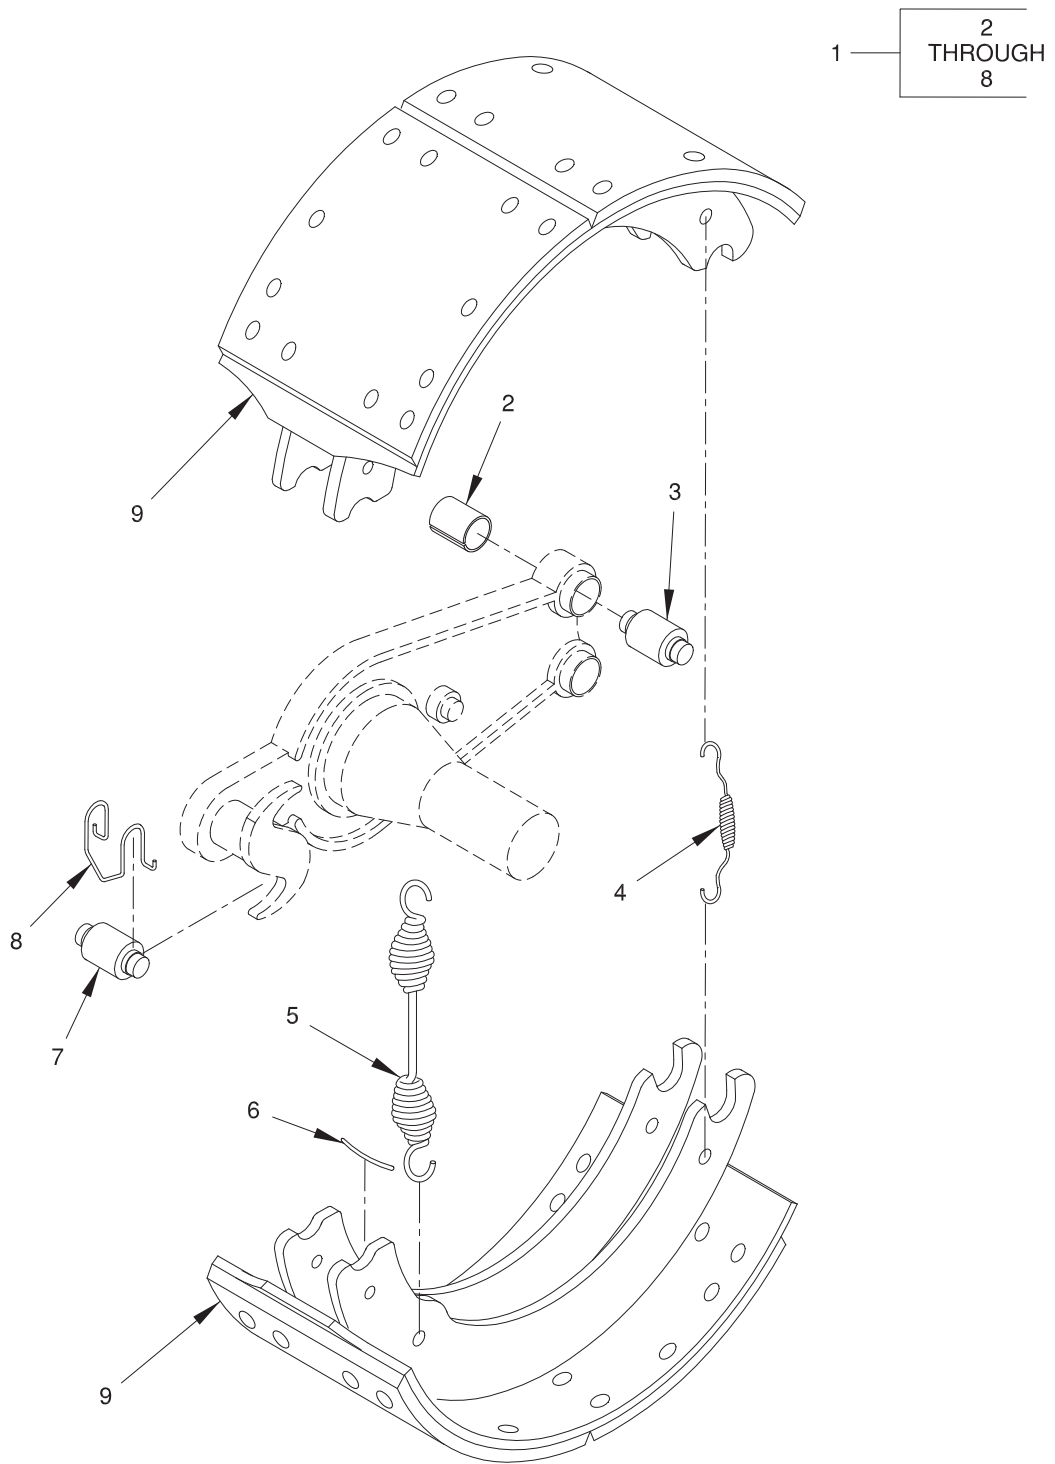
Group 1100 REAR AIR BRAKE ARM & SLACK ADJUSTER.
